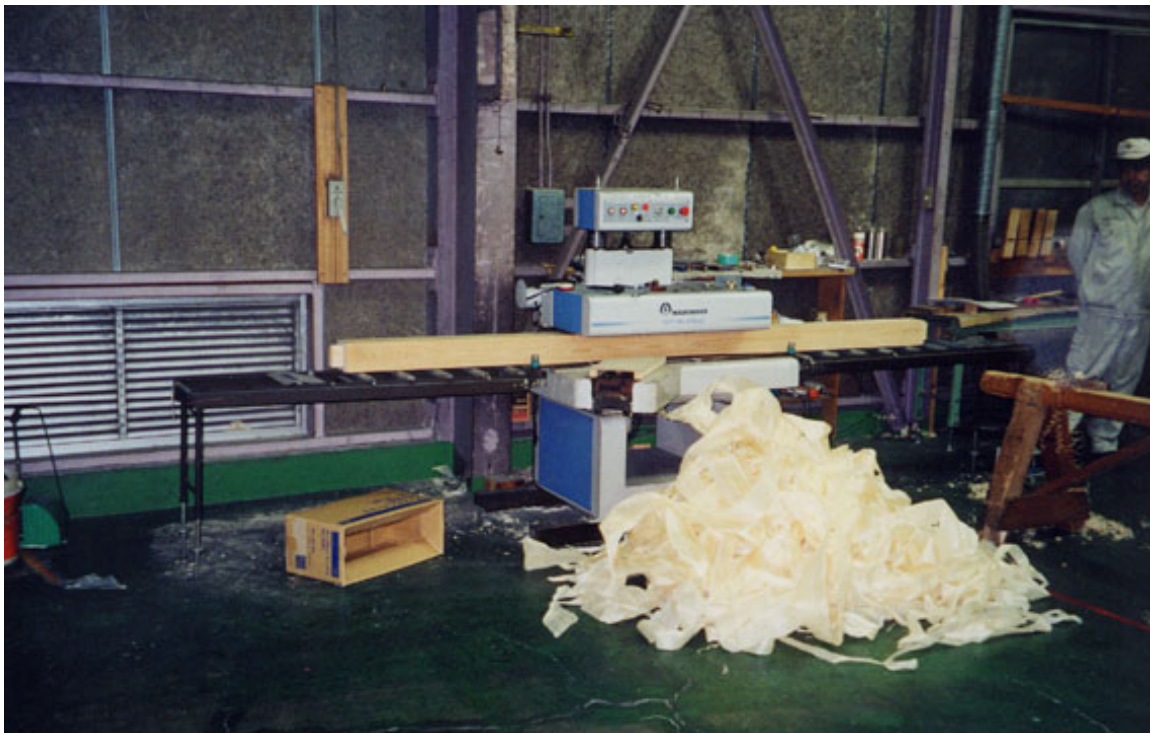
Yellow cedar wall post (*hashira*) being planed.
